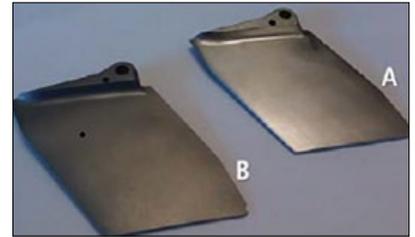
Excalibur control fin. The machined part (A) and the part manufactured by MIM (B) [Courtesy Raytheon Corp]
